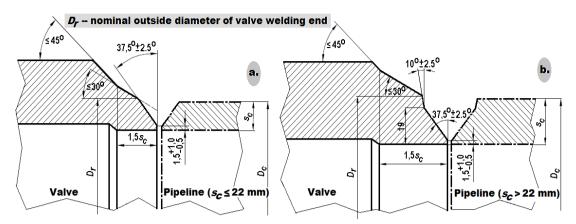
Requirements [12] regarding the weld bevels for installing ball valves : a. valve welding ends for connection to a pipeline with the wall thickness $s_c \le 22$ mm; b. valve welding ends for connection to a pipeline with the wall thickness $s_c > 22$ mm.
